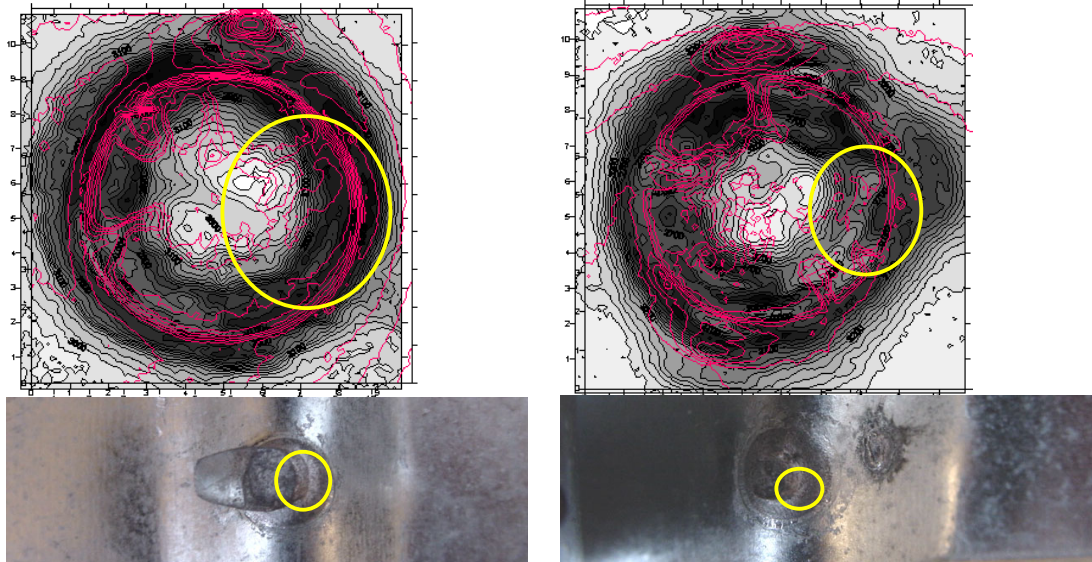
C-Scan images obtained using acoustic microscopy for a good weld (left) and an undersized weld (right). Pictures of the weld nuggets obtained after peeling the samples are shown in the lower images.
